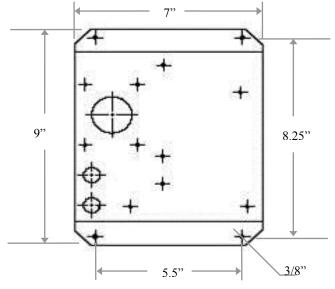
Dimensions to mount the Separated Wet Section. (Dimensions are Inches)
